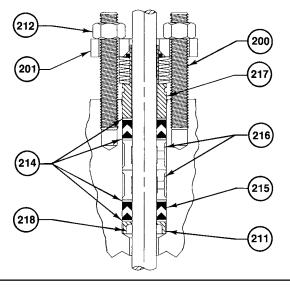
Typical ENVIRO-SEAL Packing System with PTFE Packing
